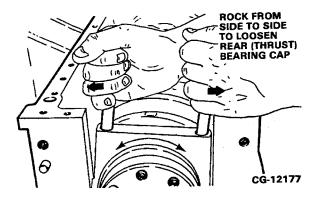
Remove Rear (Thrust) Bearing Cap
